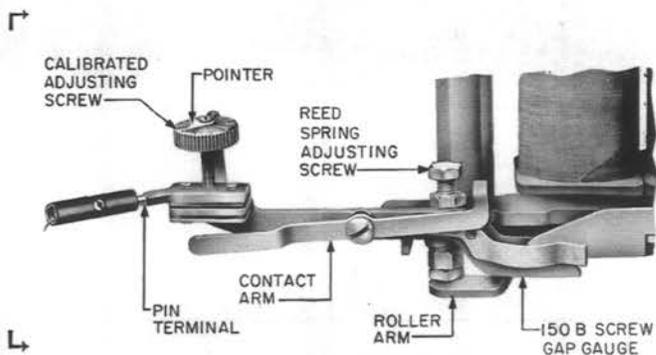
Method of Checking Gap Between Reed Spring Adjusting Screw and Arm
